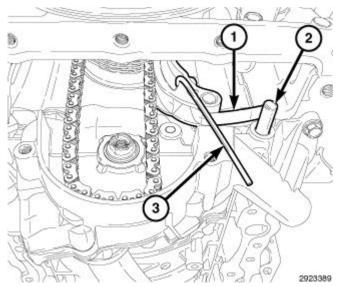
Oil Pump, Locator Pins & Bolts Courtesy of CHRYSLER GROUP, LLC
